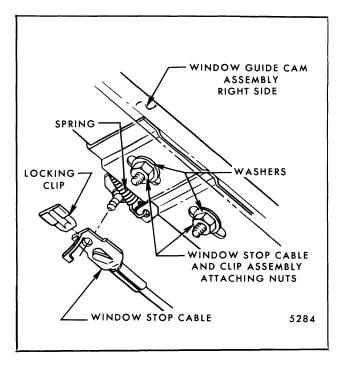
Window Stop Cable and Clip Assembly Attachment
